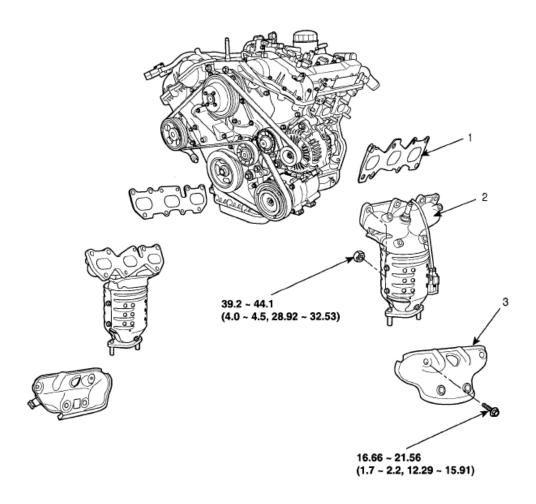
Exploded View Of Engine Block Components With Torque Specifications (2 Of 2) Courtesy of HYUNDAI MOTOR CO.
